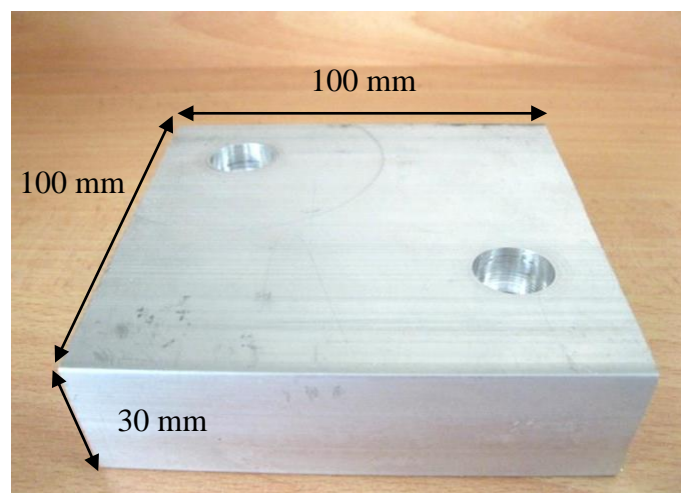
Workpiece of aluminum alloy 6061-T6.
